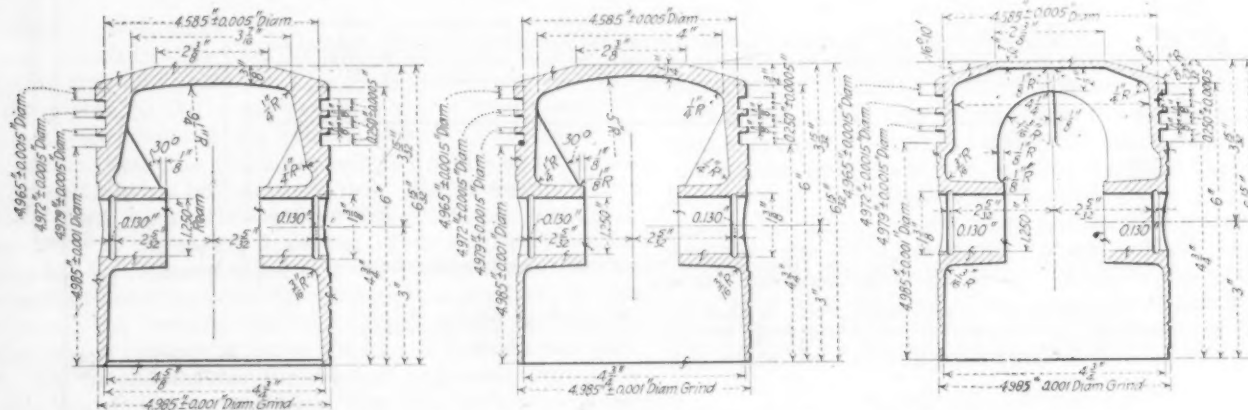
SECTIONS OF THE THREE PISTONS USED IN MAKING THE TESTS
